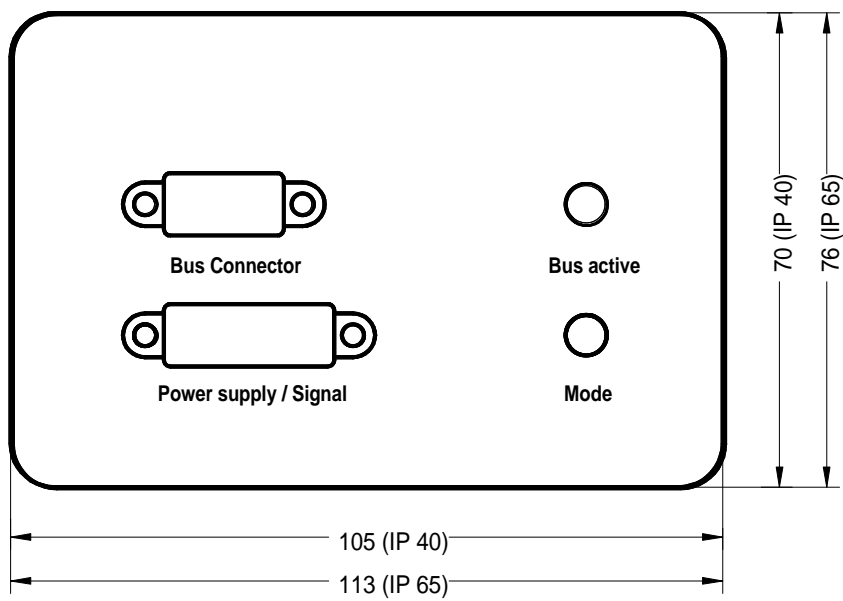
ATMION™ Wide Range Manometer Compact Version (rear view on controller)
